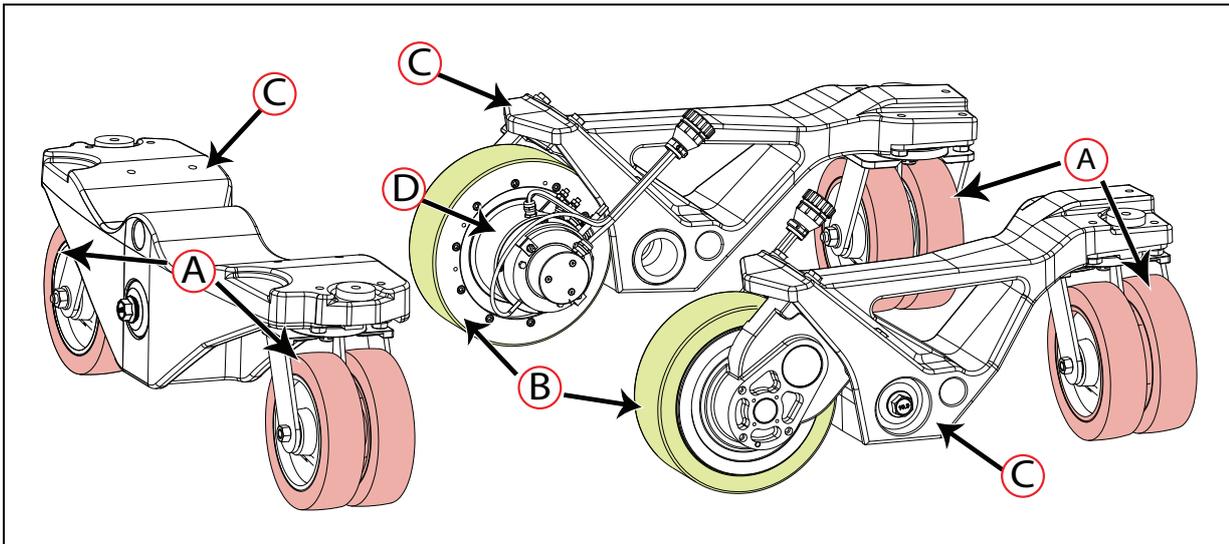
HD-1500 Drive Train (A) Casters, (B) Drive Wheels, (C) Rocker Arms, and (D) Drive Motor (one on each drive wheel)
